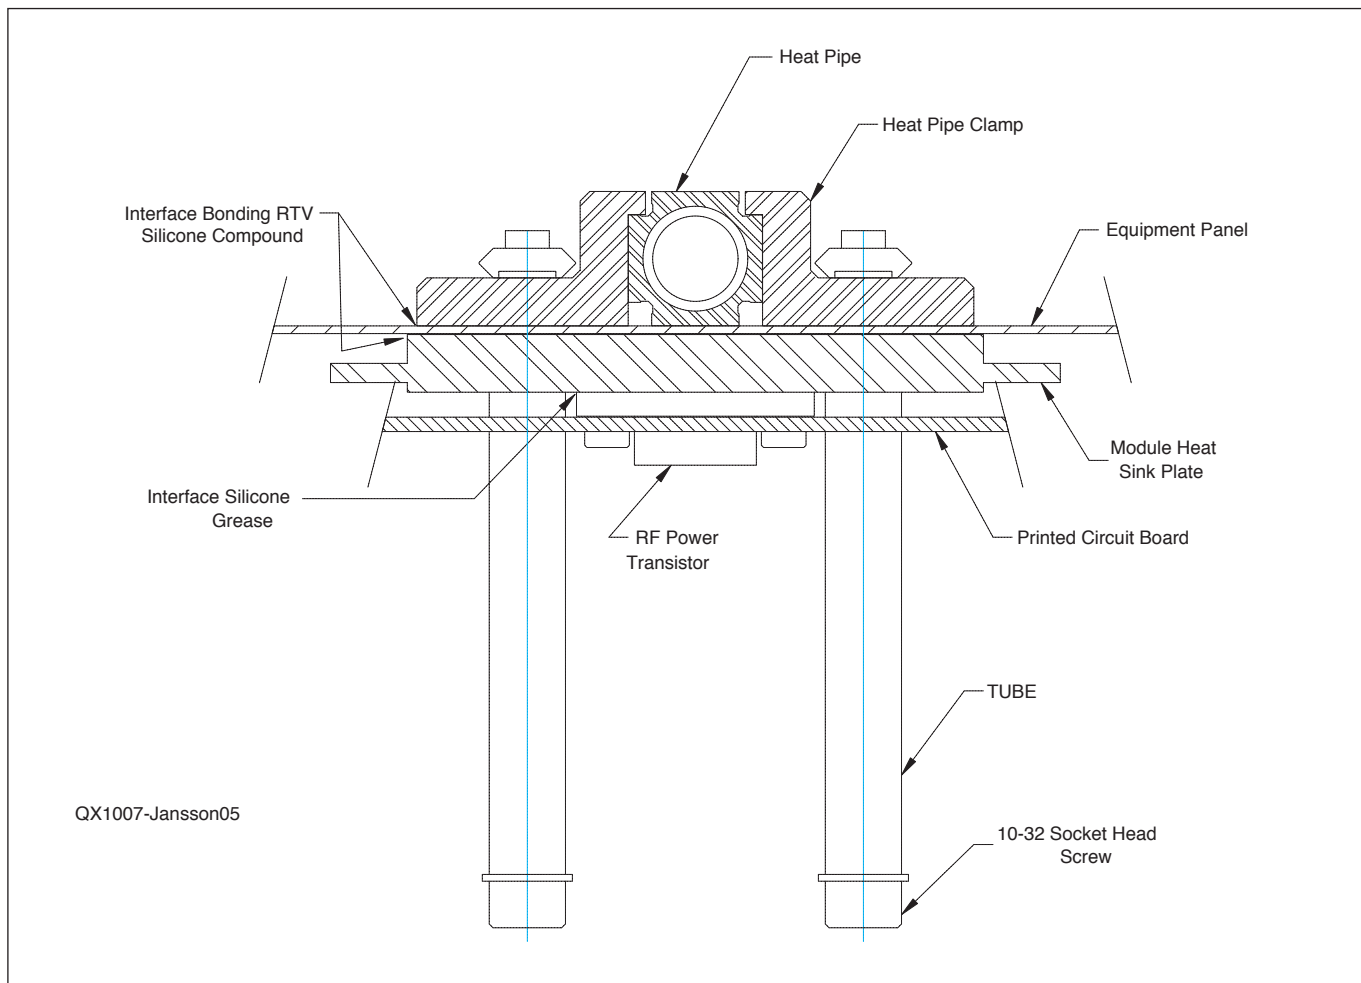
AO-40 module mounting to heat pipe cross section view. KD1K drawing
